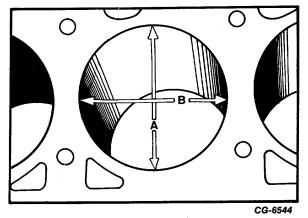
Measurements for Checking Cylinder Bore Out-of-Round
